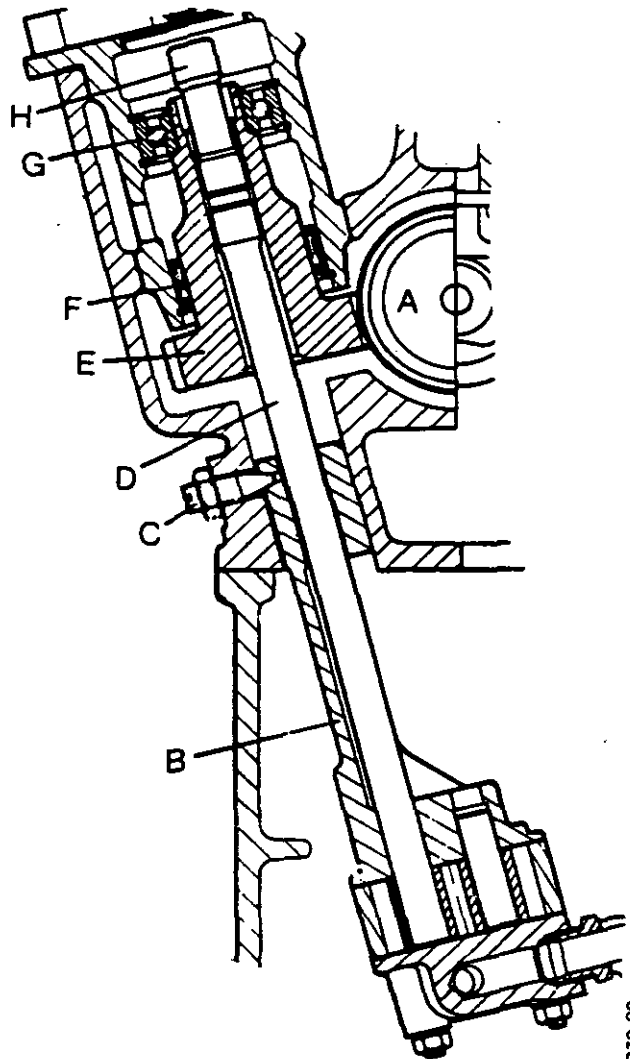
NEEDLE ROLLER BEARING TOOL
